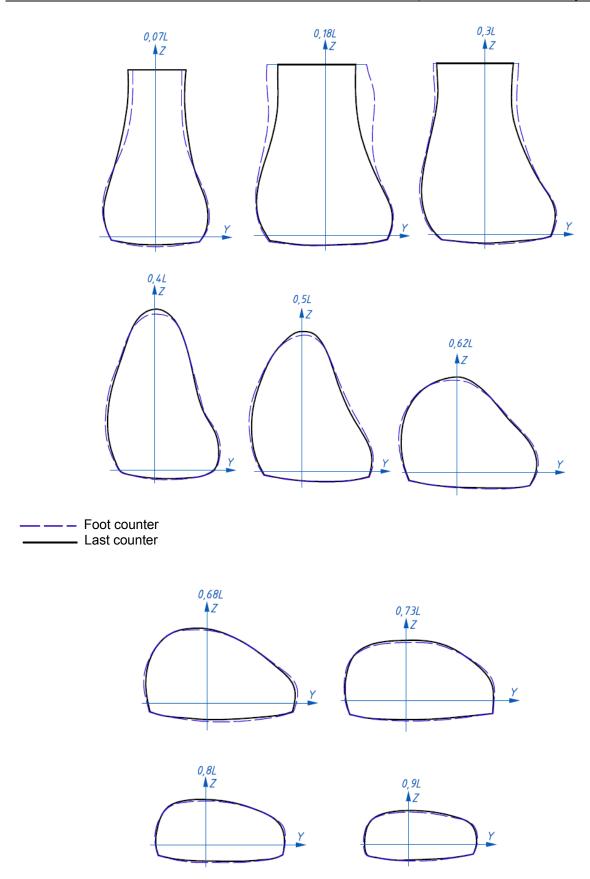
Design counter transversal-vertical foot/last section (patient (men) with diabetes, shoe size 43)
